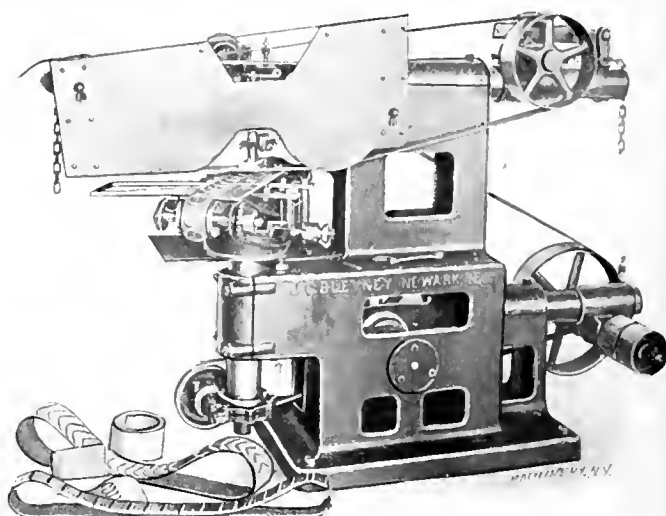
Blevney Horizontal Grinding and Polishing Machine, with Automatic Belt Feed
